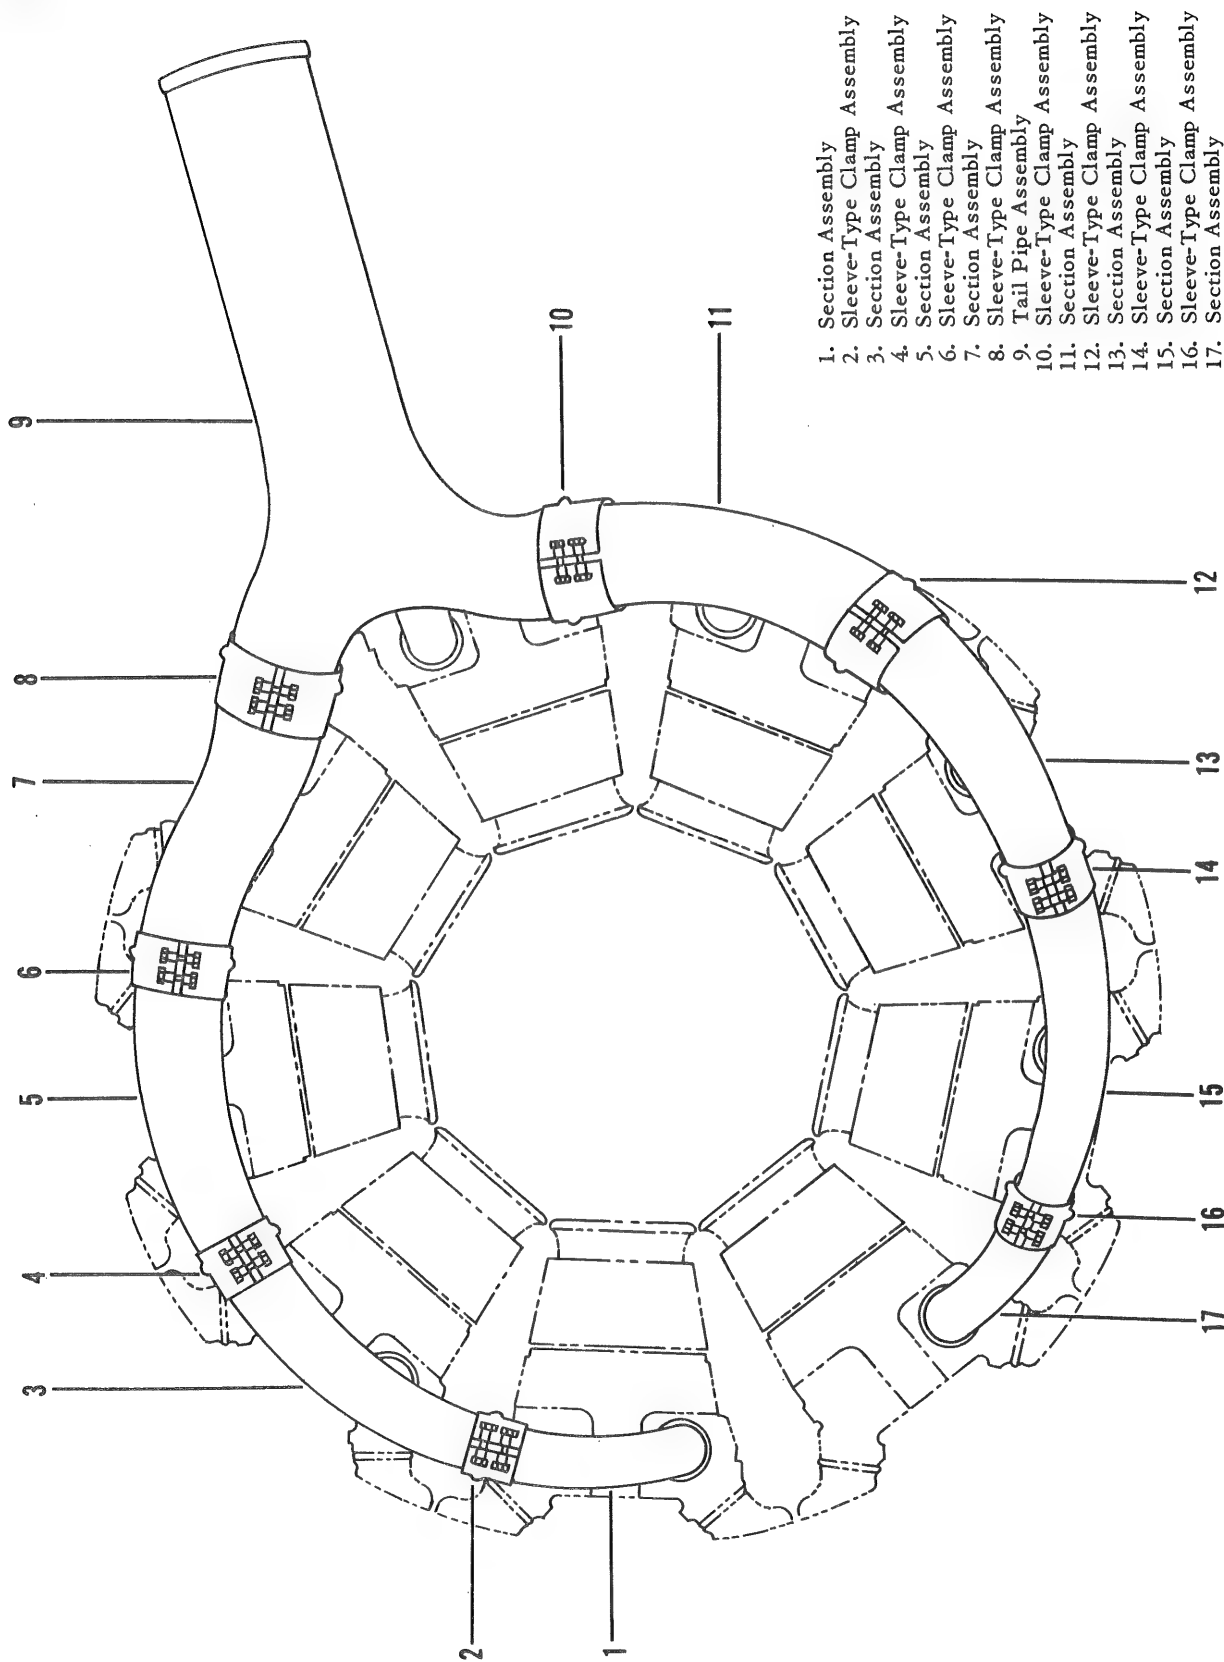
Exhaust Collector (Part No. S1630-80965)
